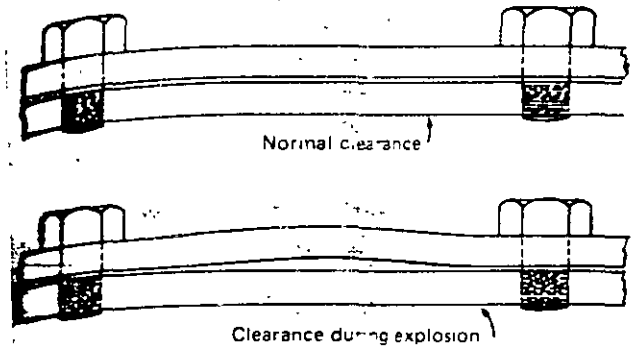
Effect of internal explosion on cover-to-body joint clearance in explosionproof enclosure. (Underwriters Laboratories Inc.)
